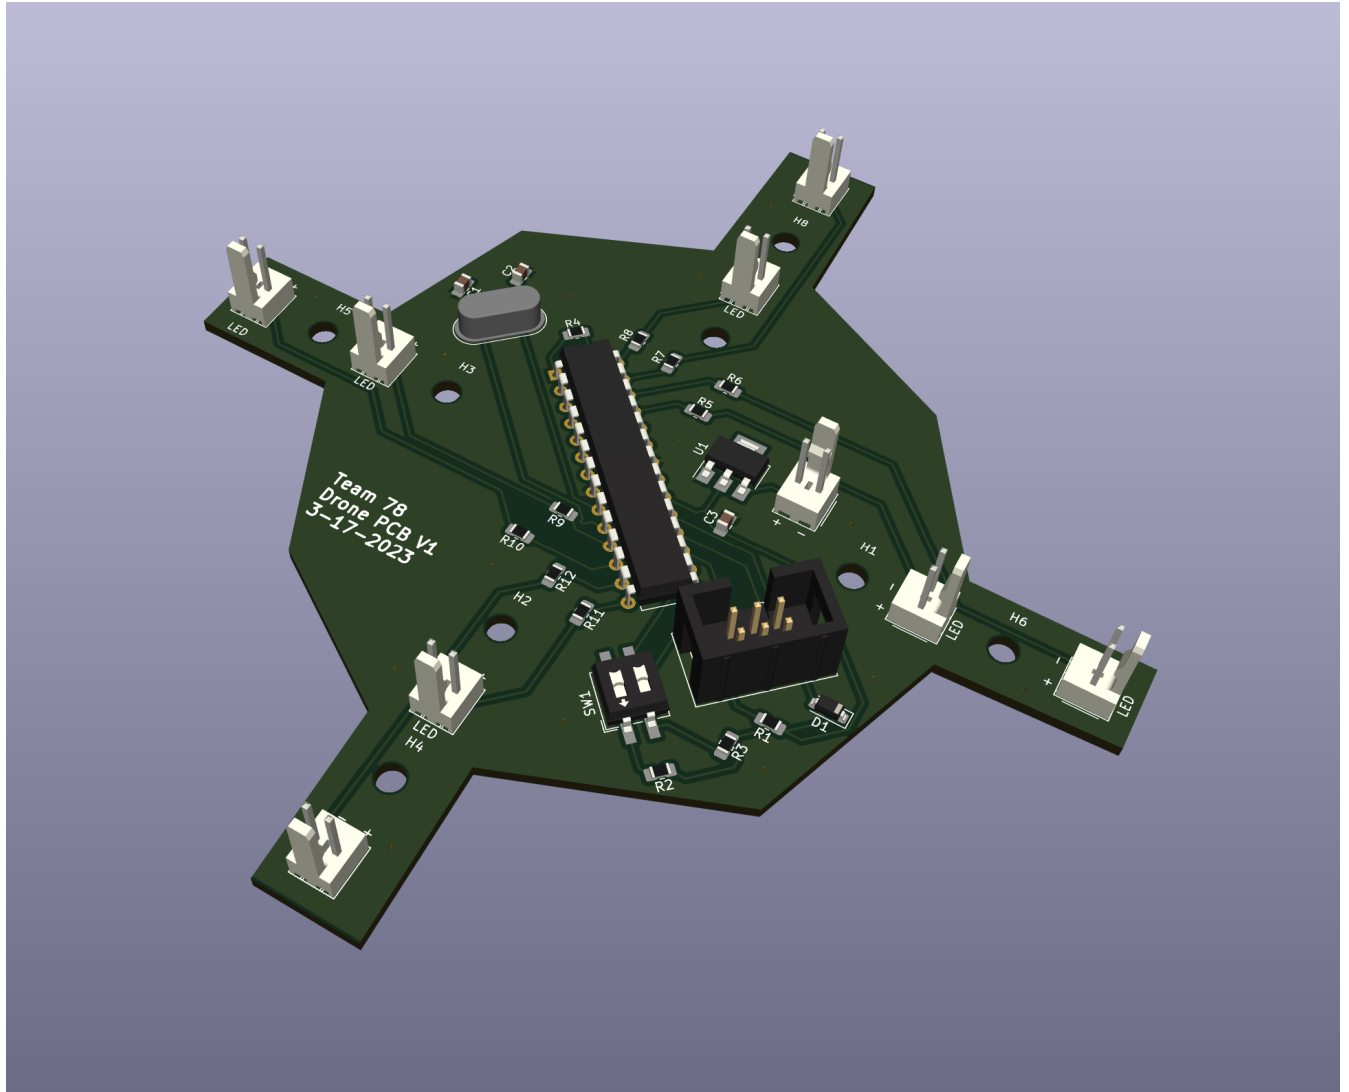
This image displays the 3D view of the PCB layout in KiCAD
